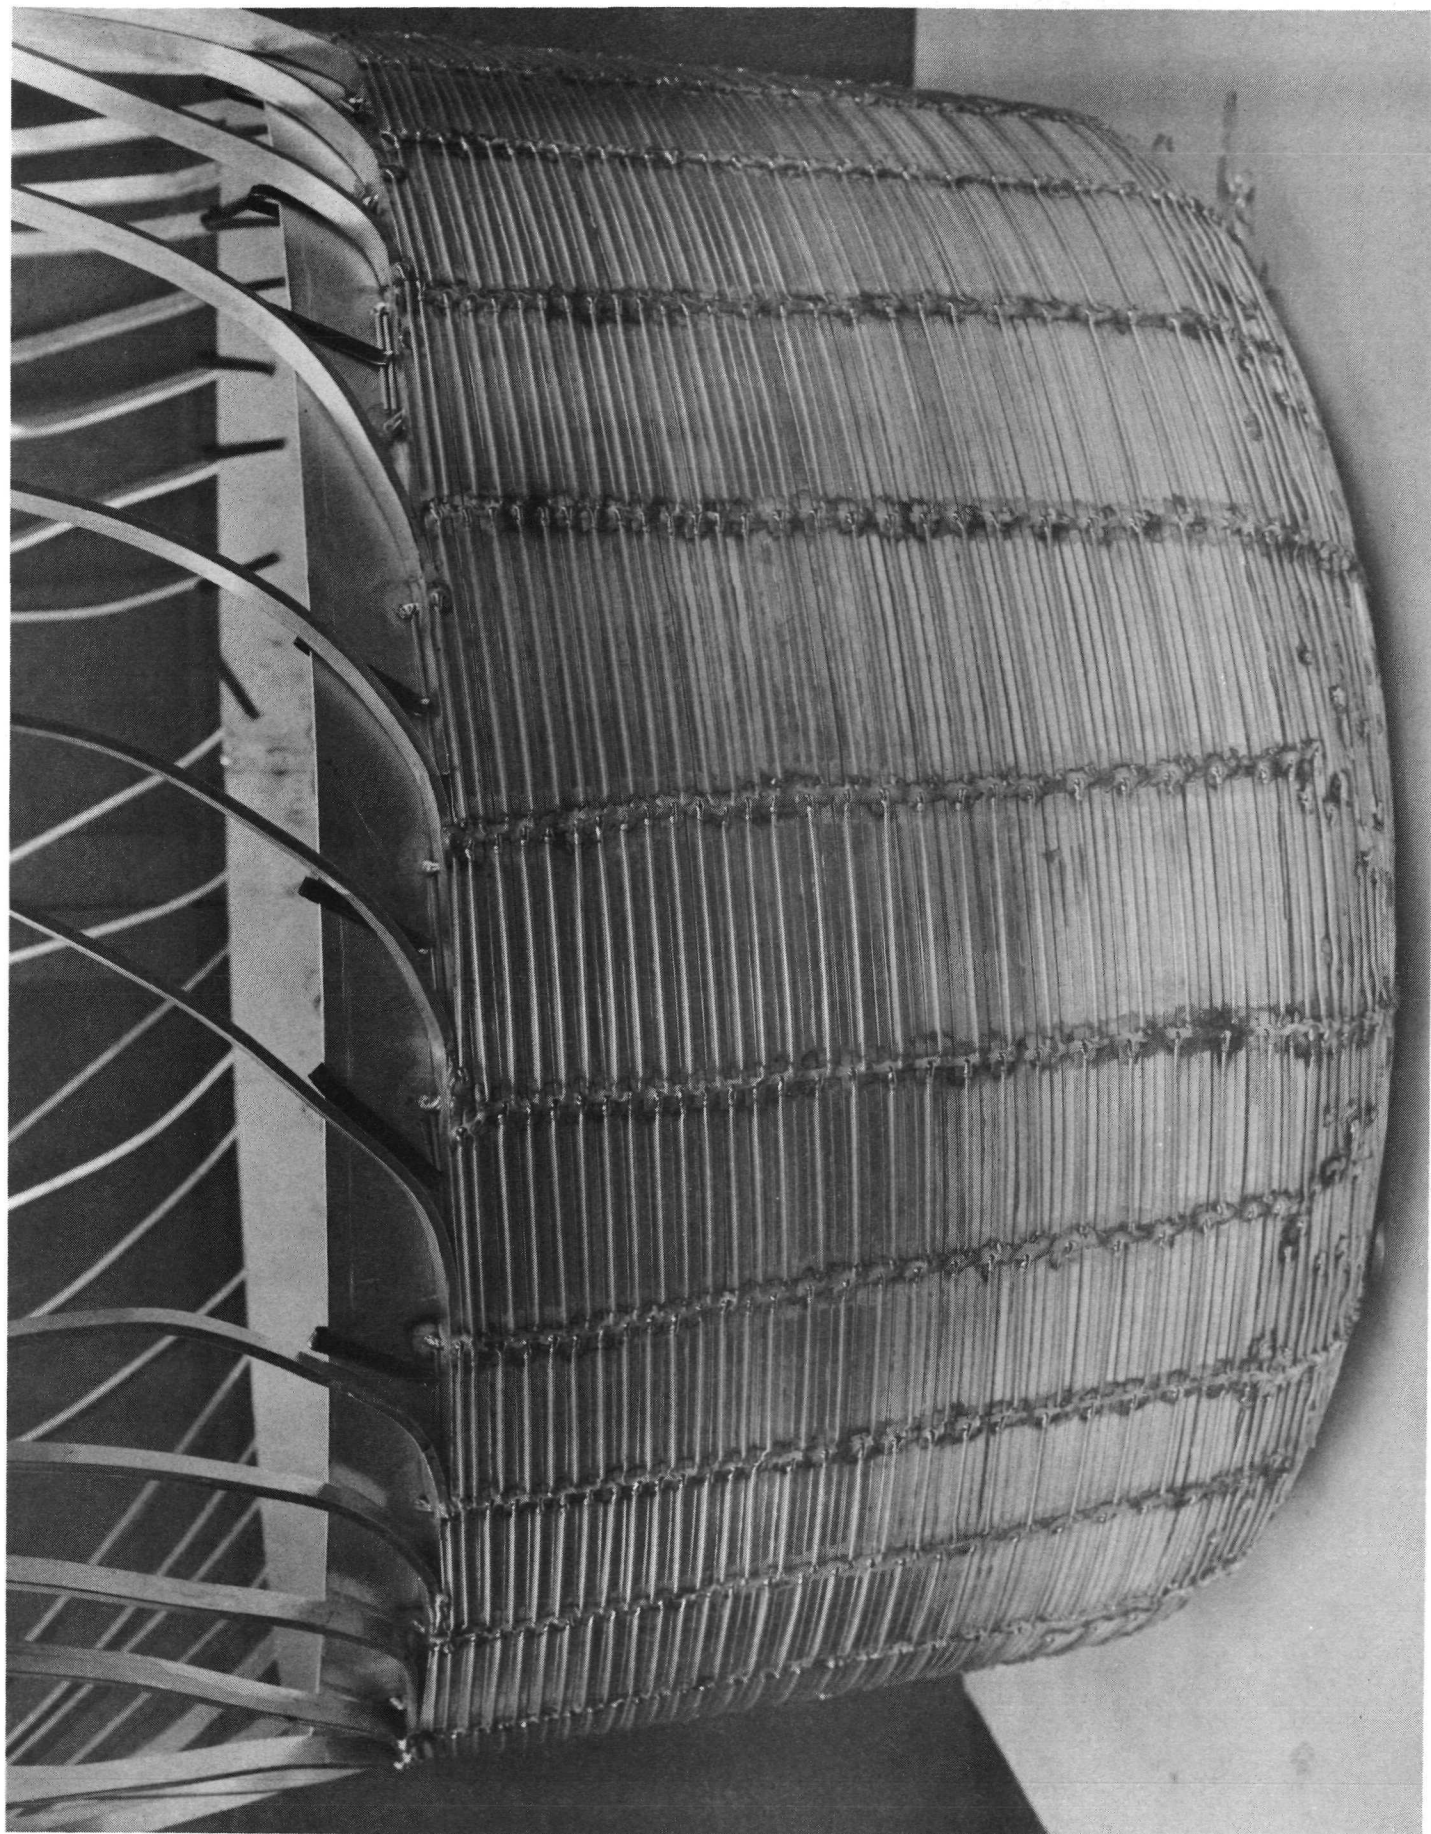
EVAPORATOR WITH BRAZE WIRE ATTACHED
